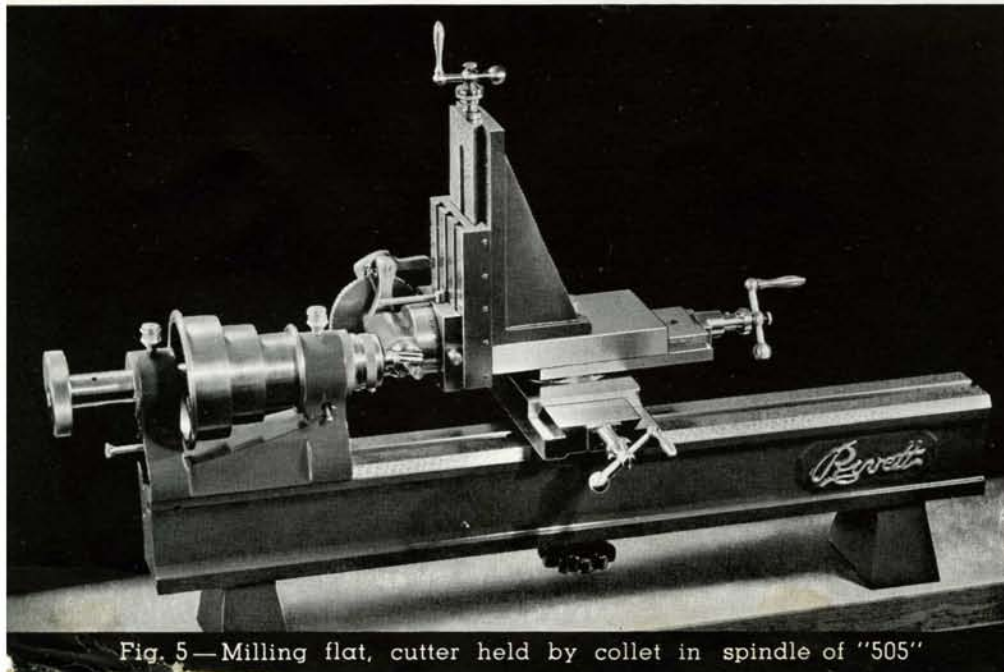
Milling flat, cutter held by collet in spindle of "505"
